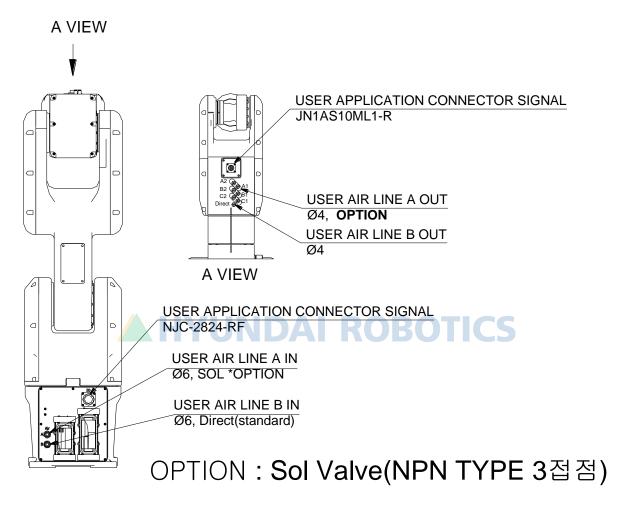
Wiring and piping drawings for application: [HH007C]
